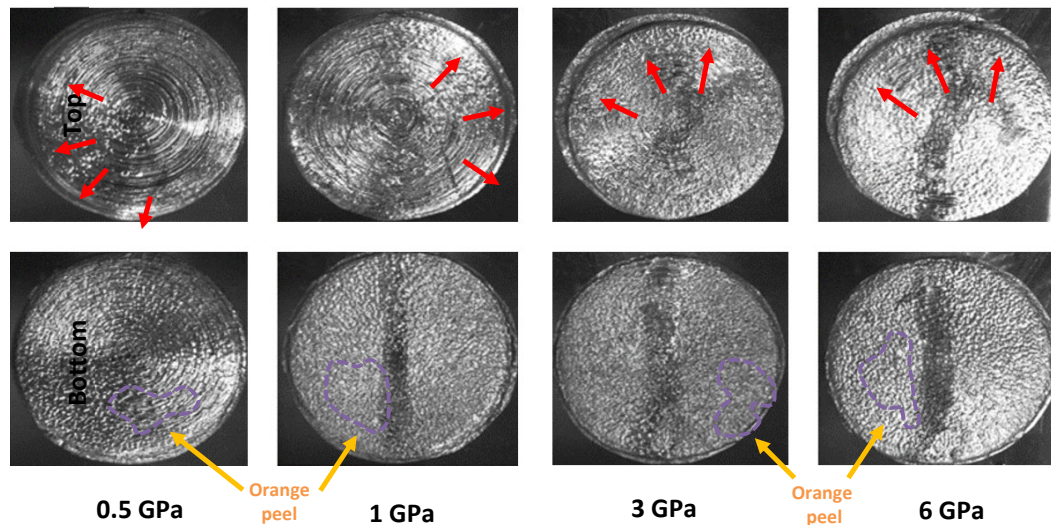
Top and bottom surface of annealed AISI 52100 samples after conducting HPT tests using 0.5, 1 GPa, 3 GPa, 6 GPa and 1 turn. Samples after tests with flash removed. Top surfaces exhibit circular grooves (except for those processed using 6 GPa) and the effects of misalignment (red arrows), whilst bottom surfaces showed a roughness pattern similar to an orange peel (enclosed with orange dotted lines).
